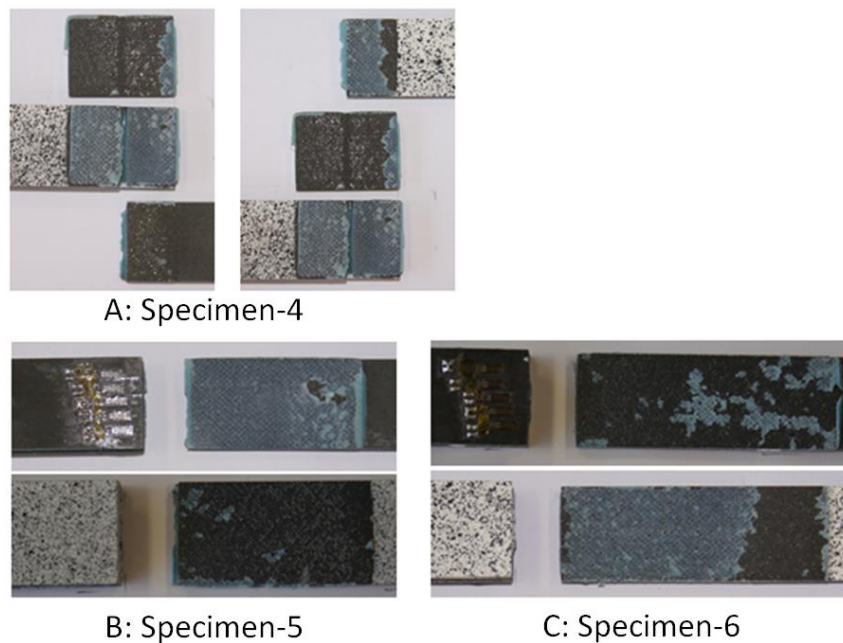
RSG Array B Specimens. Bonded surfaces post testing.
